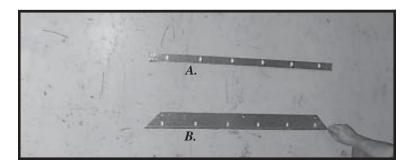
A. Top angle bracket.B. Bottom rear angle bracket.
